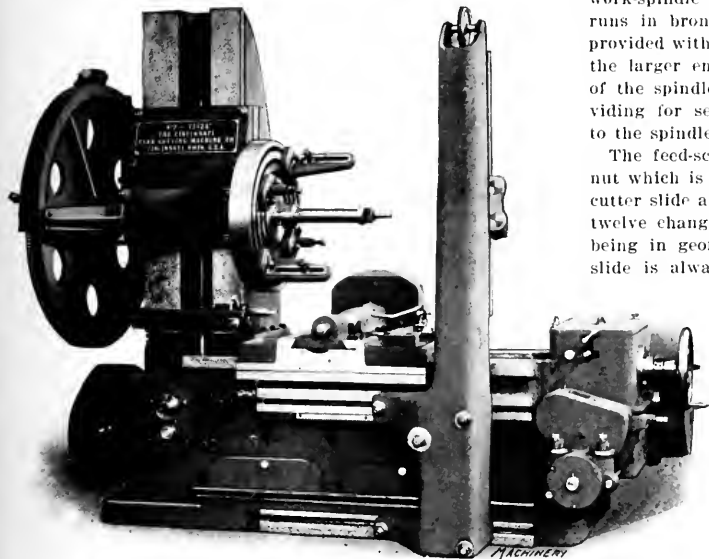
Front View of Cincinnati Automatic Spur Gear Cutter
